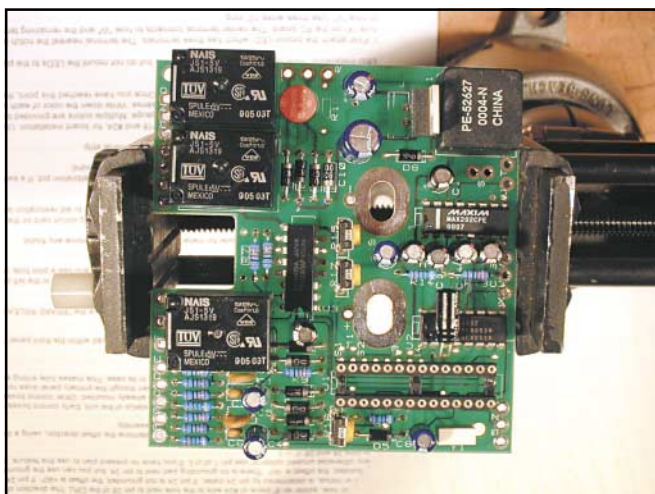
The assembled Rotor-EZ circuit board ready for installation in the rotator control box. The vacant 28-pin socket in the lower right hand corner of the board is for the PIC16C73 microprocessor.
